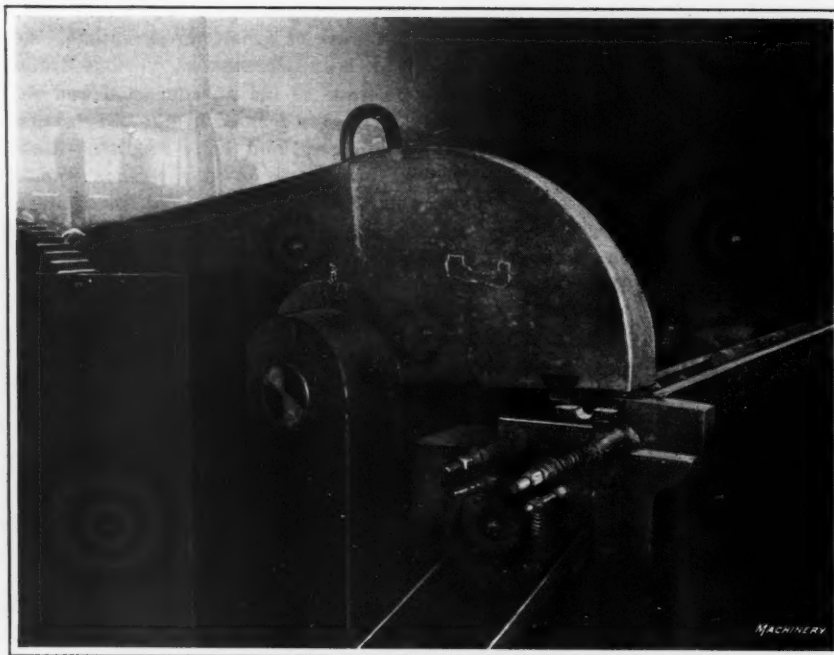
Alligator Shear used for breaking off Billets from Bars
